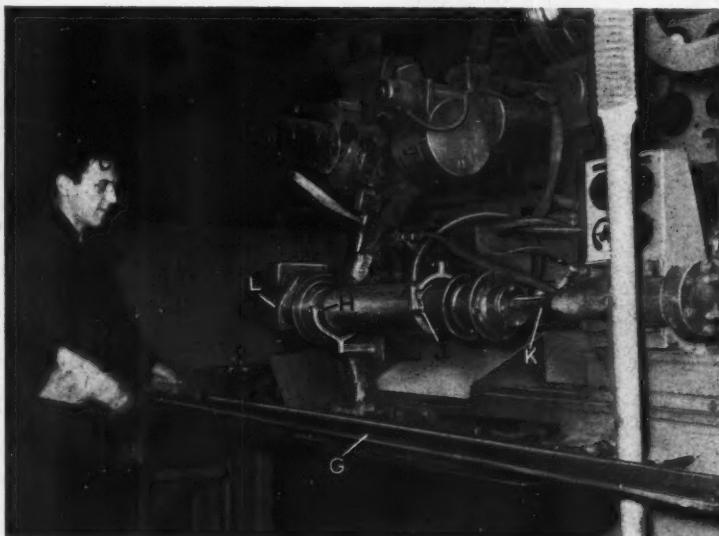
At this set-up for welding the guard-tubes to the outer tubes, on another A.E.I., Ltd., machine, the guard-tube is located automatically by the air-operated rollers *H* and *J*, before welding is begun
